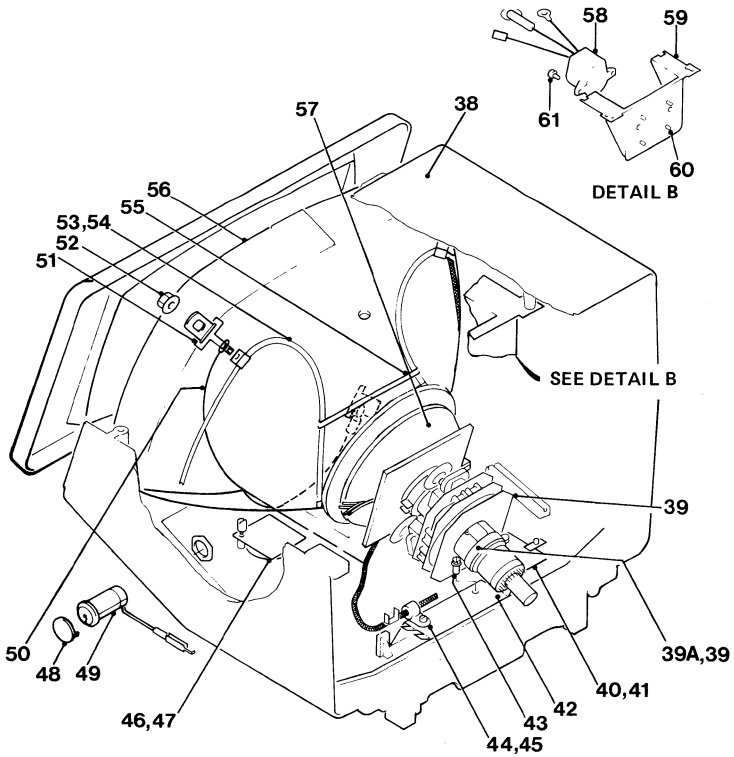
(Sheet 3 of 4). Front Enclosure Assembly
